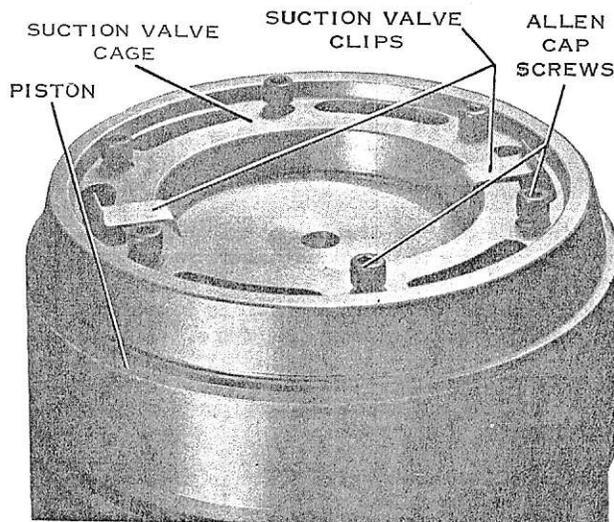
Suction Valve Clips Installed On Suction Valve Cage
